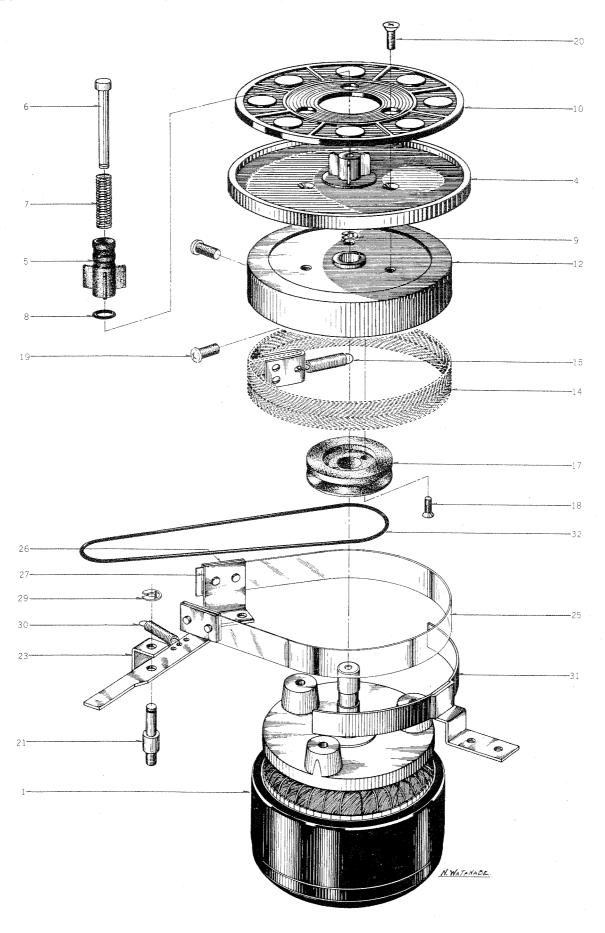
ILLUSTRATION OF MAIN MOTOR BLOCK (SCM-24)
